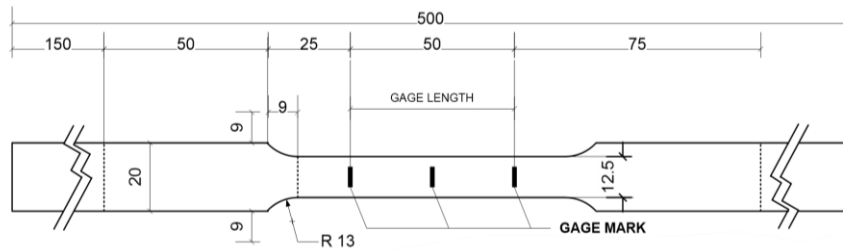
Size of Zinc plate test specimen according to ASTM A370-03a.
